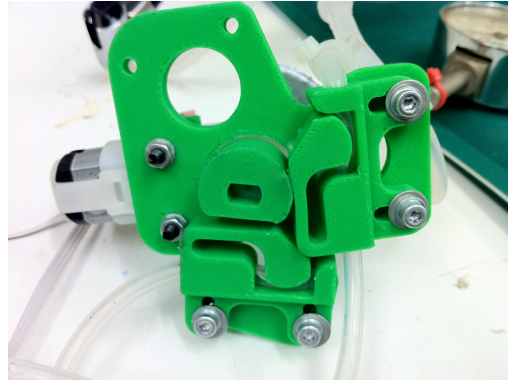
Rapid Prototyped Valve. All parts in green are produced using fused filament fabrication
